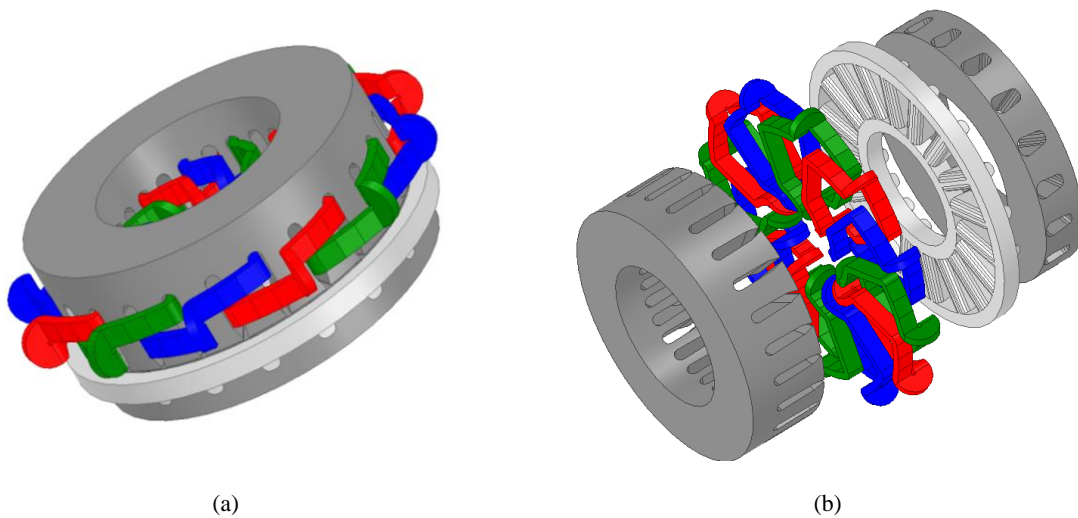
(a) 3-D assembled view and (b) exploded views of the designed AFIM.
